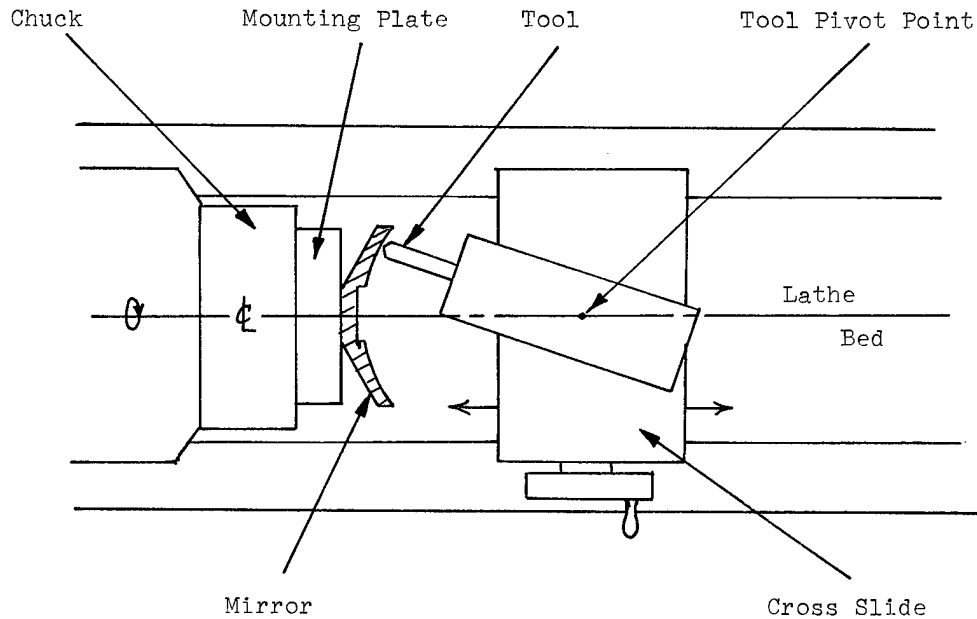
Setup For Machining Single Best Fit Sphere And Multiple Radii Test Mirrors On A Precision Machine Lathe \*\
